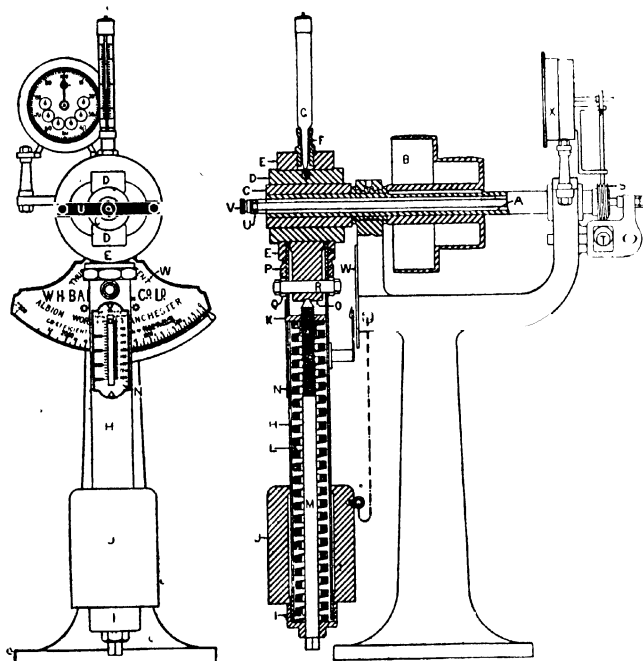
THE BAILEY-THURSTON OIL AND BEARING METAL TESTING MACHINE.
